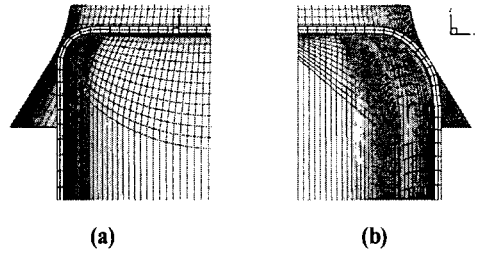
Initial shape of the tool positioning at the stage 3 with the modified design: (a) major axis; (b) minor axis
